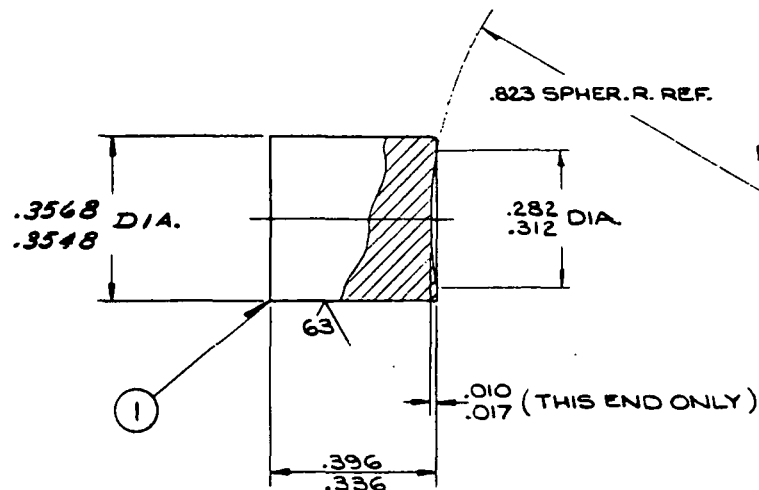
A - Non-Removable Saxton Plutonium Fuel Rods
